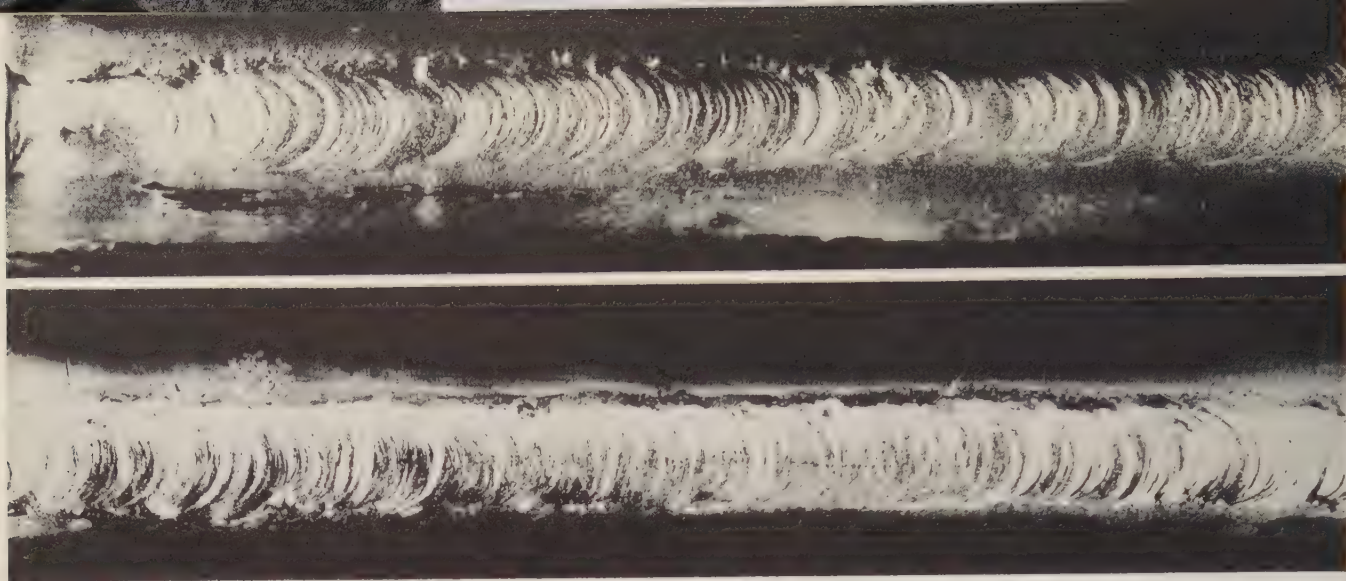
Comparison of fillet welds indicates no apparent difference in the microconstituents of the weld produced by the two gas mixtures. (Top) A weld made using the helium-nitrogen mixture. (Bottom) Weld made with a helium-argon mixture.
